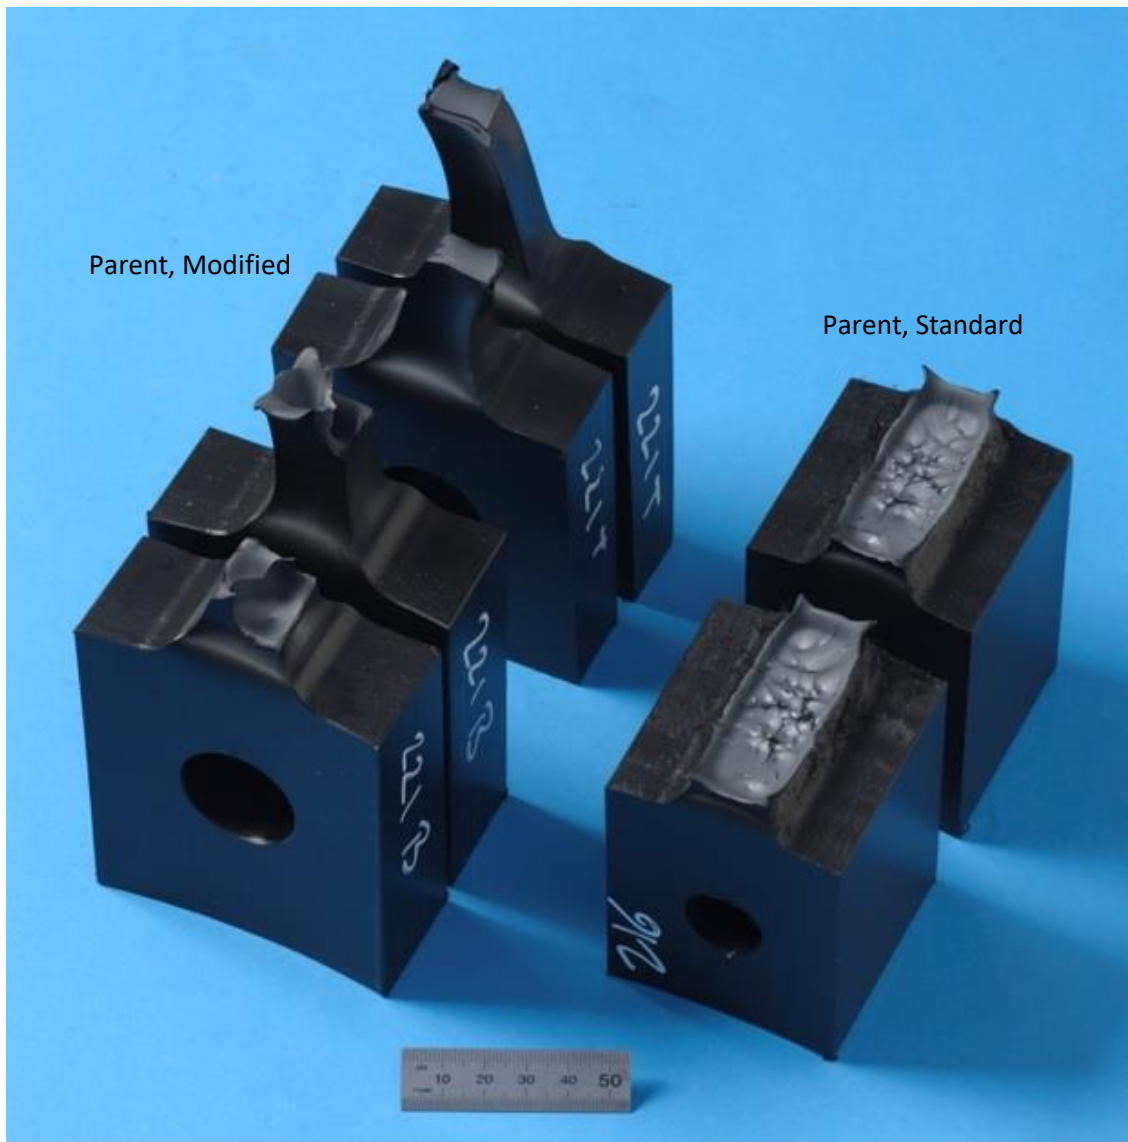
, Fracture surface for parent 630mm OD pipe SDR 11 using standard on the right and modified geometry on the left
